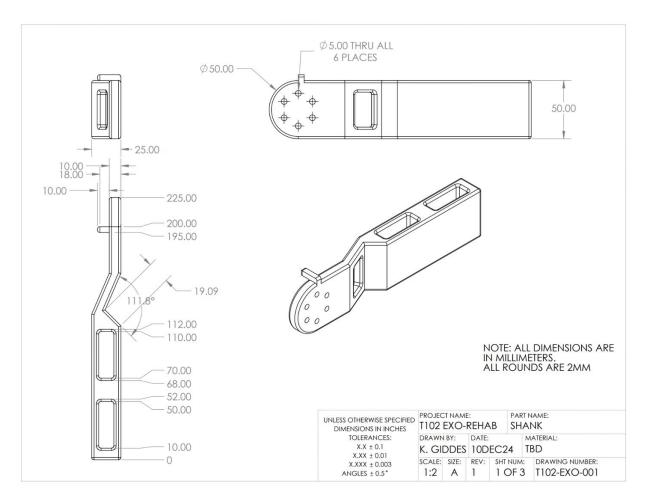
Technical drawing of the shank. The shank attaches to the user's body to transmit the torque from the actuator to the body. Made using SolidWorks.
